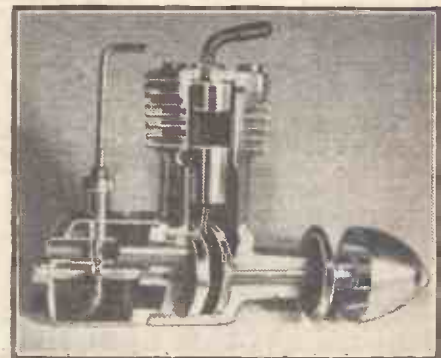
Sectional E.D. Mark I "Bee" 1 c.c. diesel engine.
